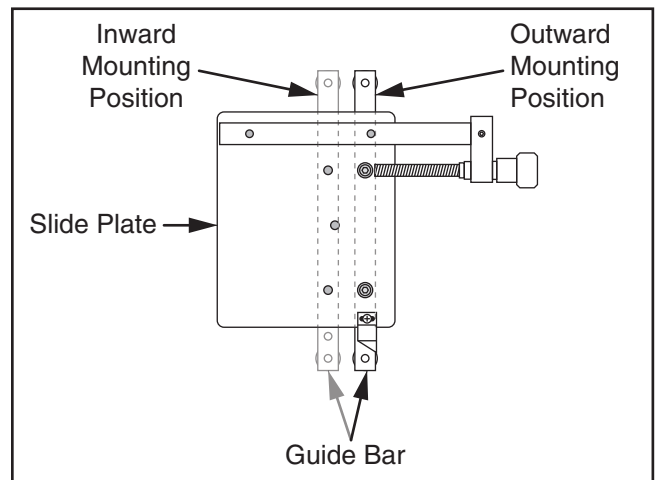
Guide bar mounting positions (slide plate shown removed for clarity).
